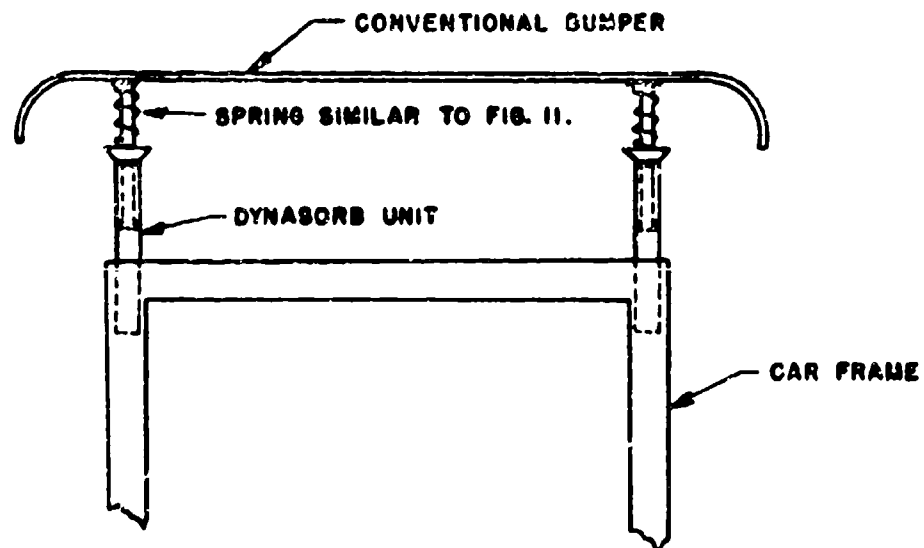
BUMPER INSTALLATION LOW LOAD PLUS HIGH LOAD
